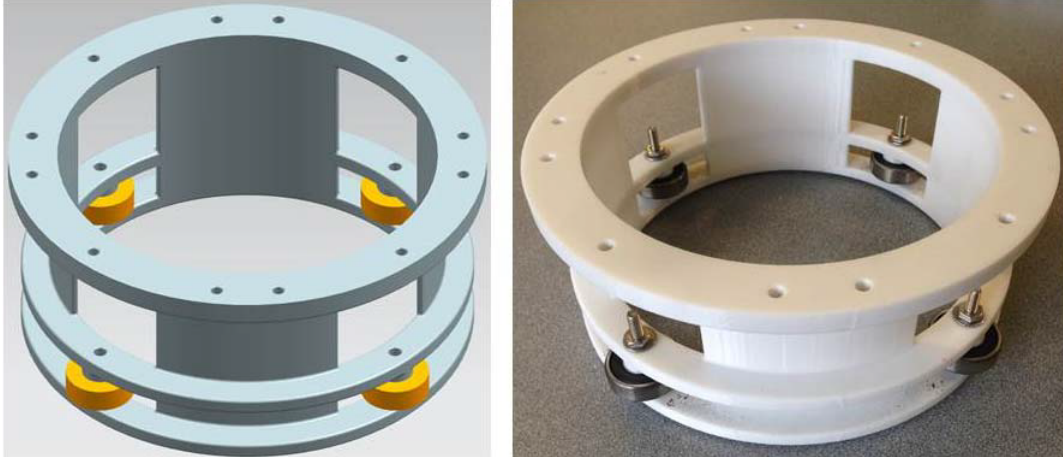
Air bearing 1-DOF collar, CAD model (left), assembled component (right)
